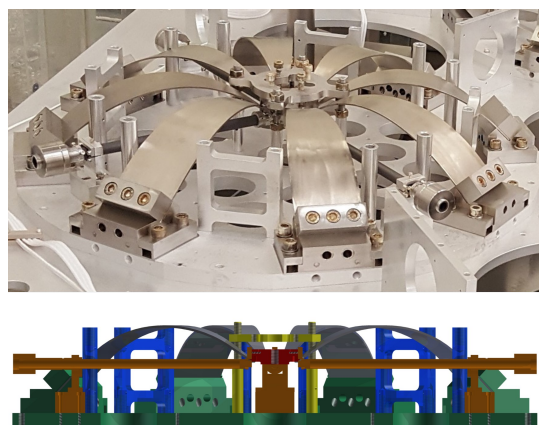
Photograph and CAD drawing of an AEI-SAS GAS-filter. The photograph shows the GAS-filter during installation. It is bolted on the lower spring-box plate and surrounded by stiffening plates. The CAD drawing shows a sectional view of the GAS-filter with the CoP compensators in brown and the stiffening posts in blue. The yellow structure in the center is for holding the keystone (red) in position during installation. It is removed when the GAS-filter is under load.
